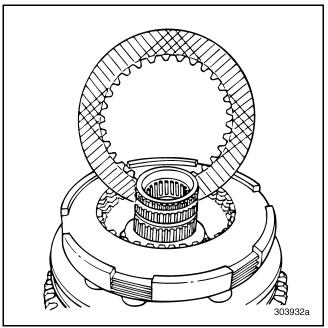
Removing Friction Disc (T313L/T318L Shown)
